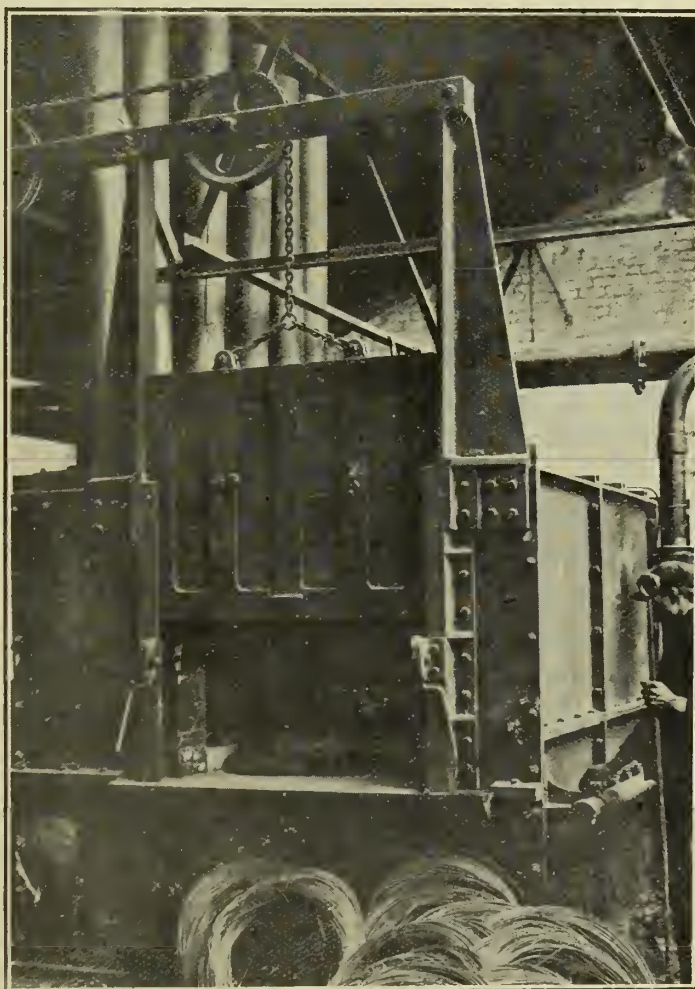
ANNEALING WIRE IN GAS-OVEN FURNACE.
